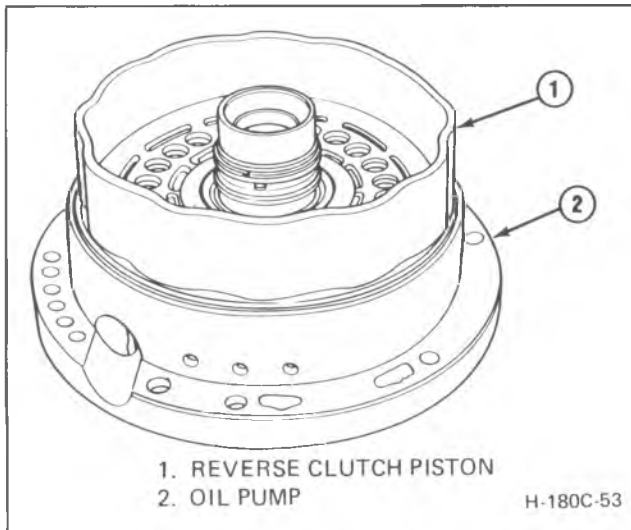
Installing Reverse Clutch Piston Into Oil Pump
